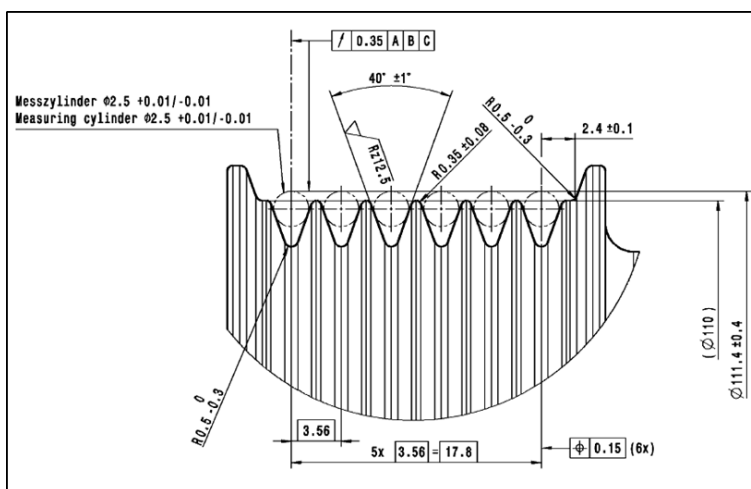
Detail U – Drive pulley for refrigerant compressor (example DENSO 7SAS17)
